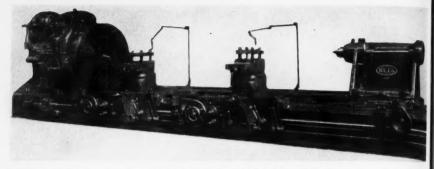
Small Guns up to 6-Inch Caliber are Turned Out in this Lathe. The 60-Inch Faceplate in Driven by a 50 H.P. Induction Motor
